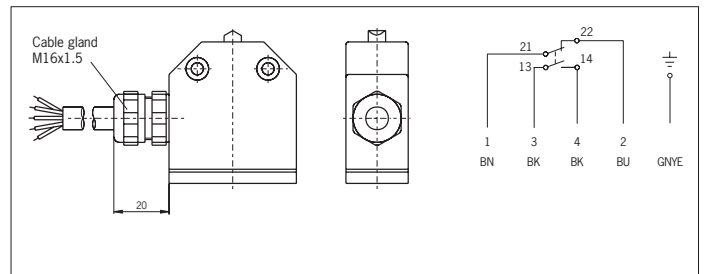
Dimension drawing/connection diagram SN01.558X... with connection cable (PUR cable, 5x0.5 mm²)
